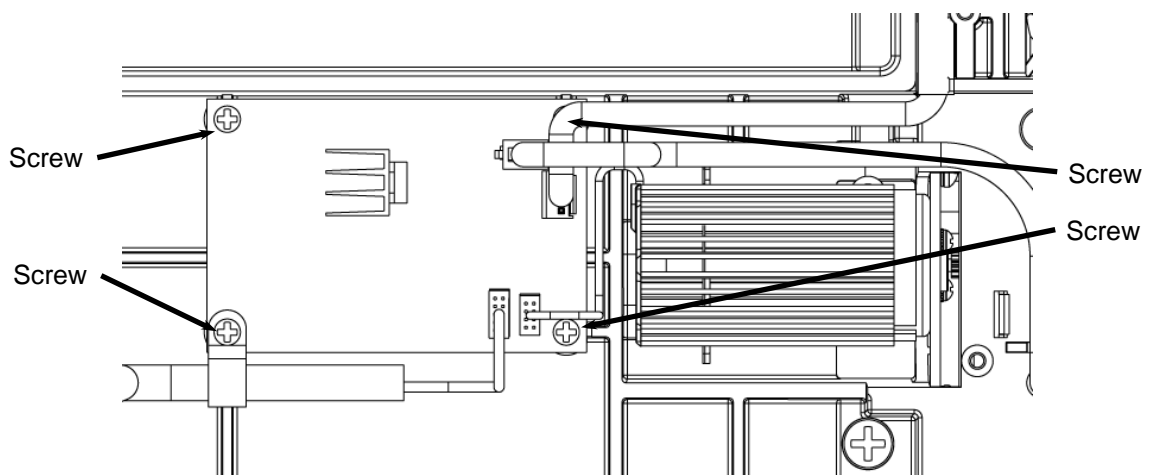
AC MOTOR CONTROL BOARD ATTACHMENT SCREWS
